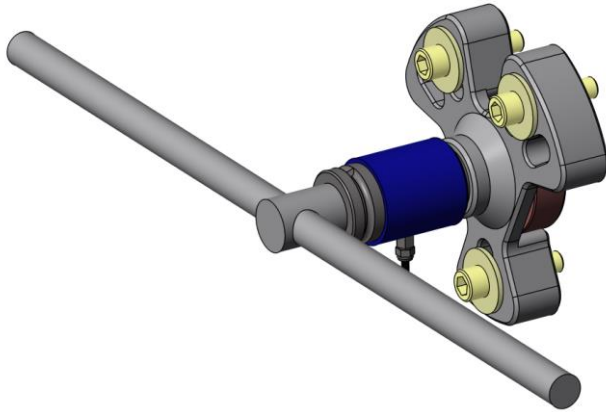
T-handle and Reference Calibration Sensor attached via wheel hub adapter to the wheel hub.
